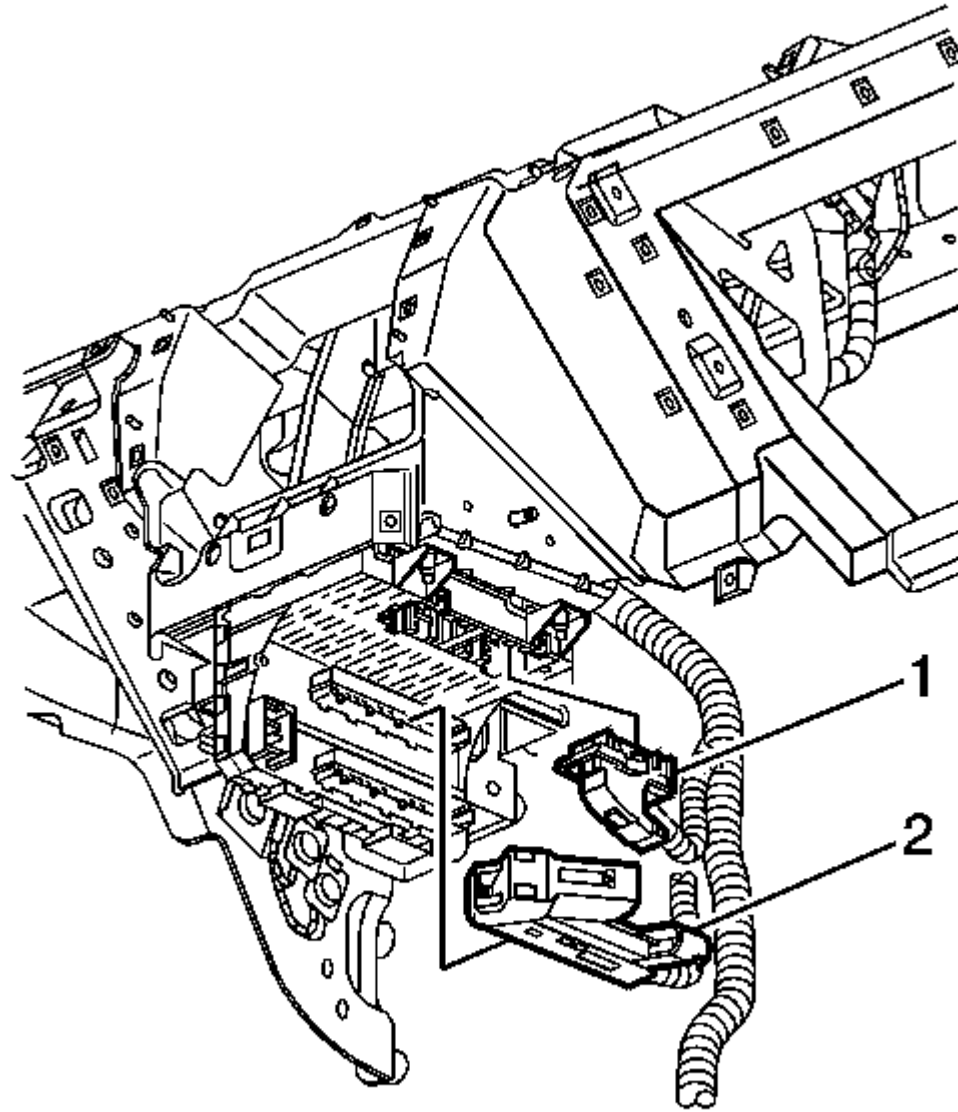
View Of BCM I/P Wiring Harness Connectors
